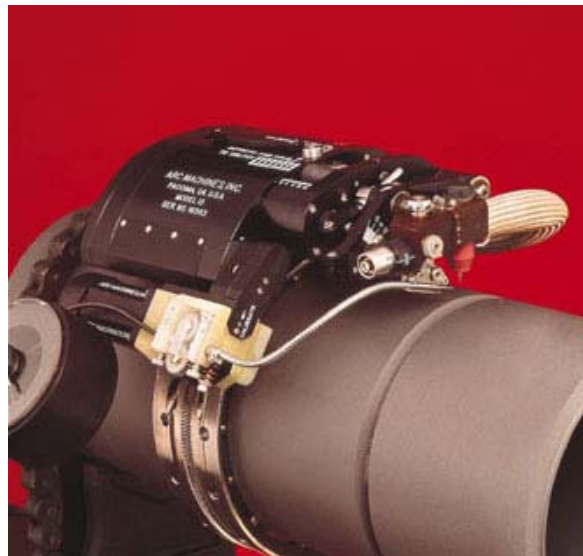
The Arch Machine model 15 (Arc Machine, Inc.)
